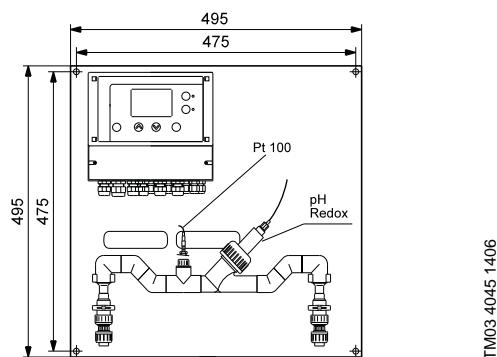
Dimensions, Conex® DIS-PR preassembled system for pH or redox (ORP)
